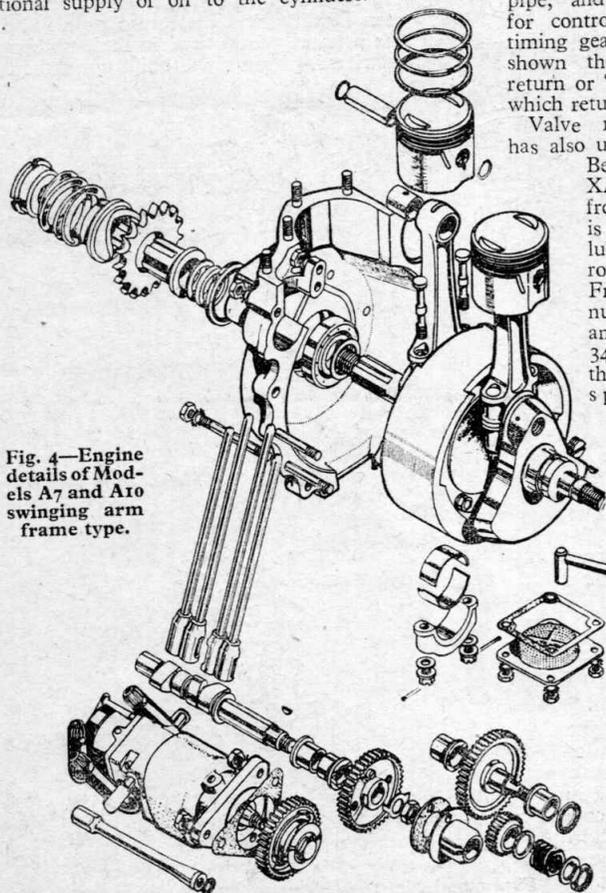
Engine details of Models A7 and A10 swinging arm frame type.
